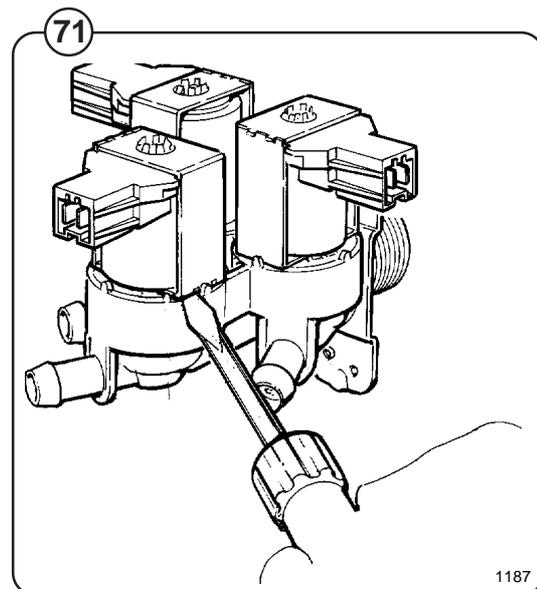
• Pull the coil straight upwards. Use a screwdriver if necessary to carefully undo the coil.
